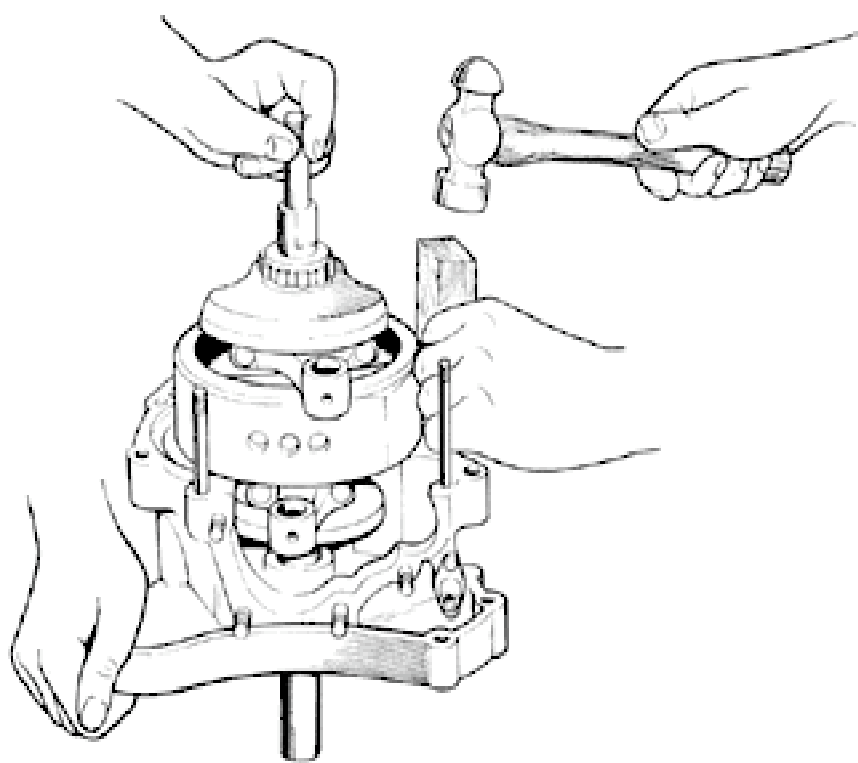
Showing suitable tube to abutt to crankshaft shoulder yet pass throguh crankcase
